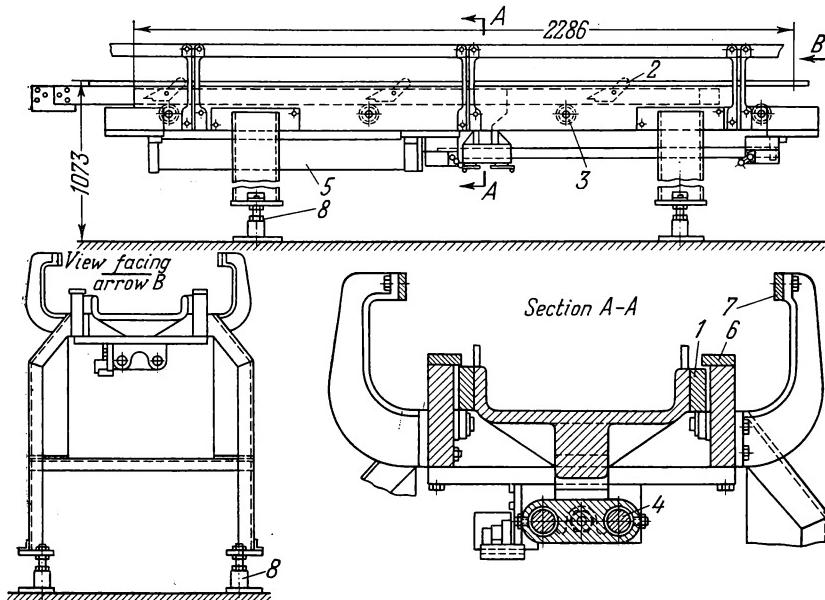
Standardized disappearing finger-type transfer bar with a hydraulic drive:
